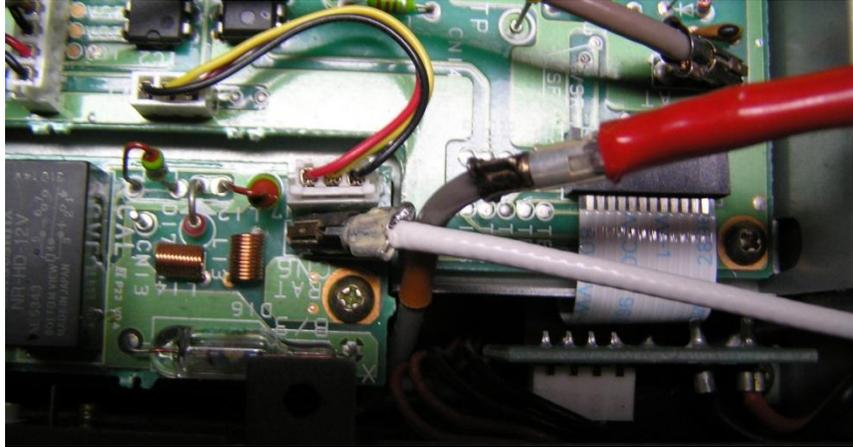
Cables plugged in at "Filter Unit" Board 3 (view from rear).
